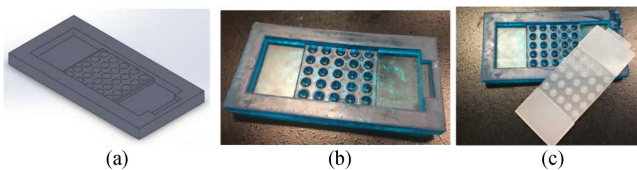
(a) CAD model of the mold for fabrication of the skin. (b) Three-dimensional printed mold for fabrication of the skin. (c) Soft silicone skin released from the 3D-printed mold.
